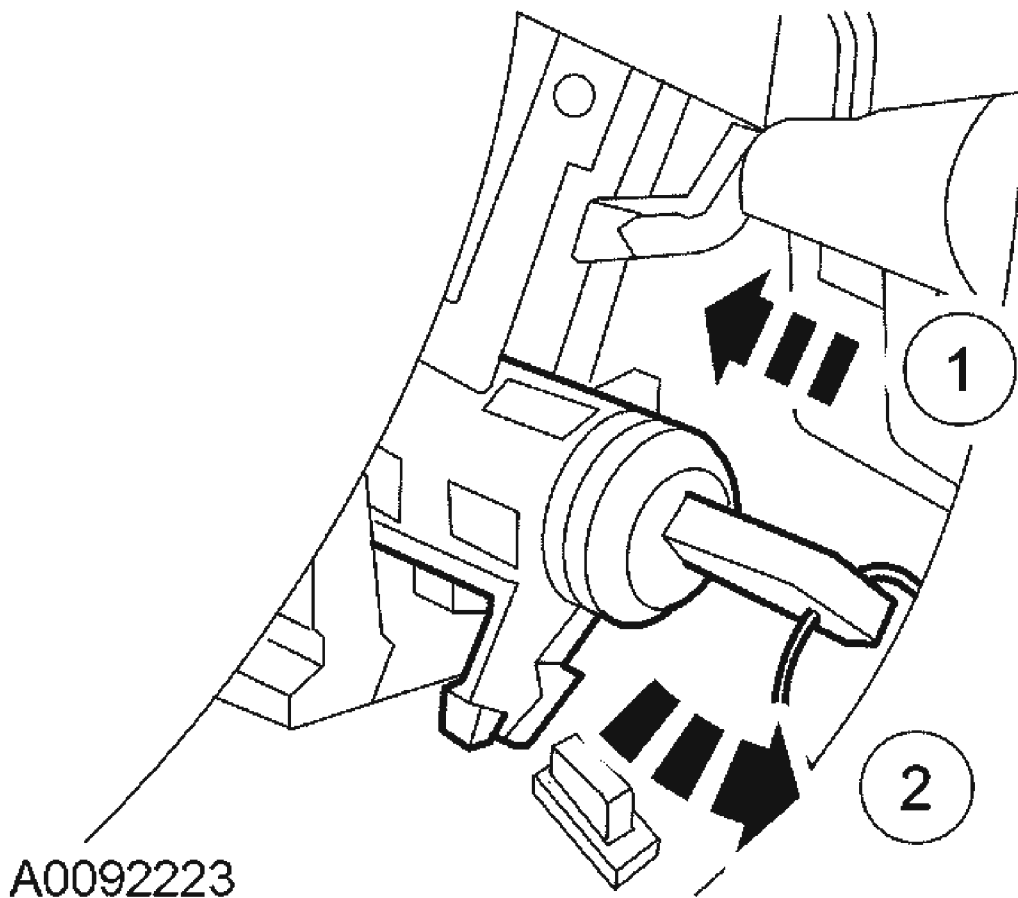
Using Lock Cylinder Repair Kit (XS4Z-11582-AA) And Installing Ignition Lock Cylinder
